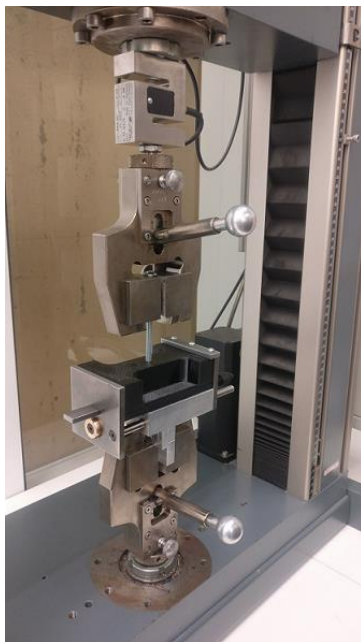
Test part and custom-made clamp assembly fitted onto the universal testing machine.
